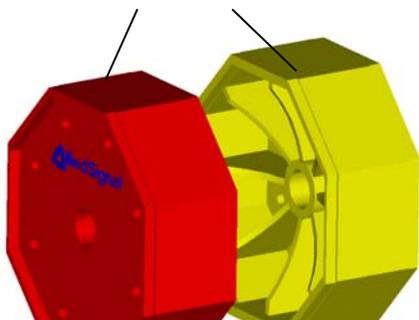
Multi-purpose universal welding & testing system (Consists from welded together two octagonal specimens [15]. Thickness of weld beads may vary from 2.5 to 6 mm. U.S. Patent # 6,193,133).
